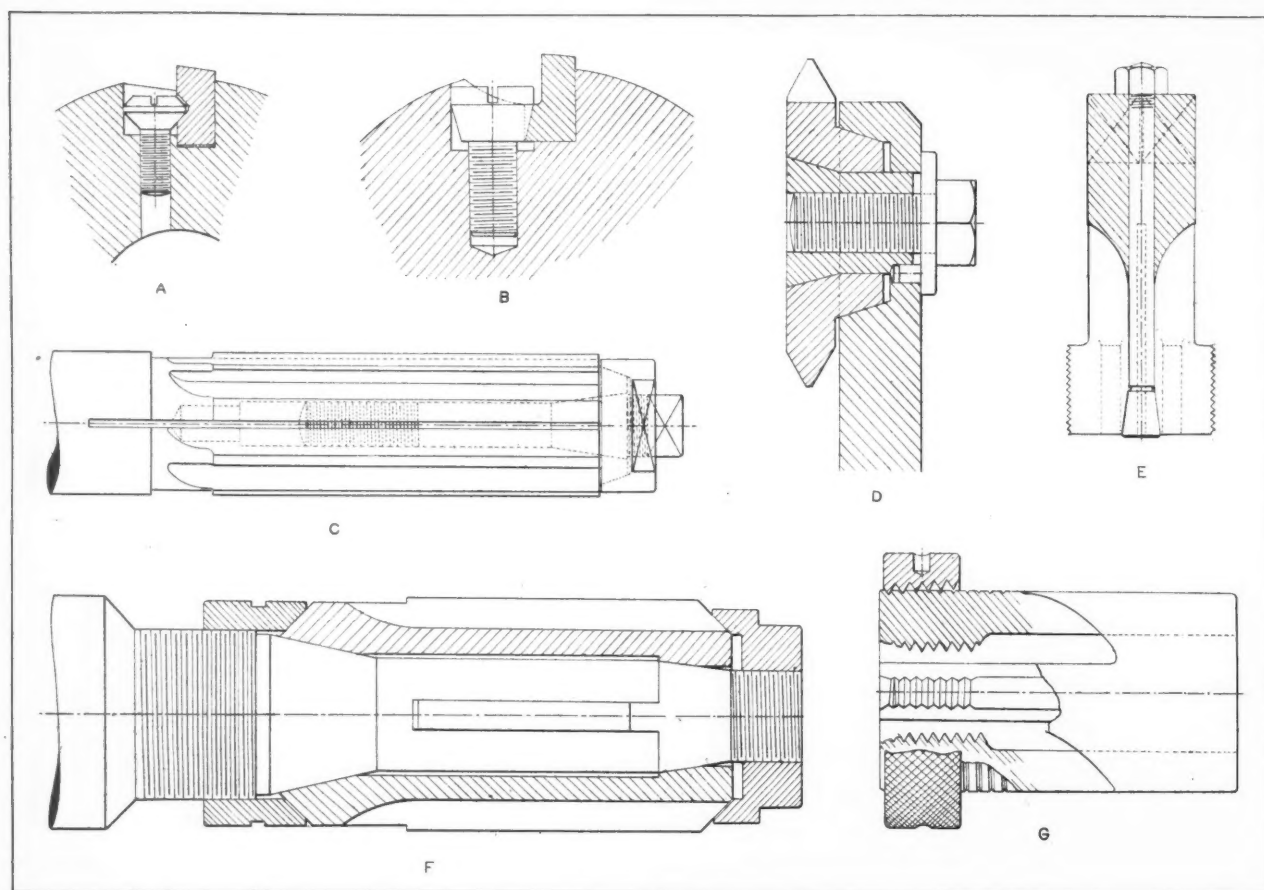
Methods of Holding and Adjusting Tool Blades and Cutters
